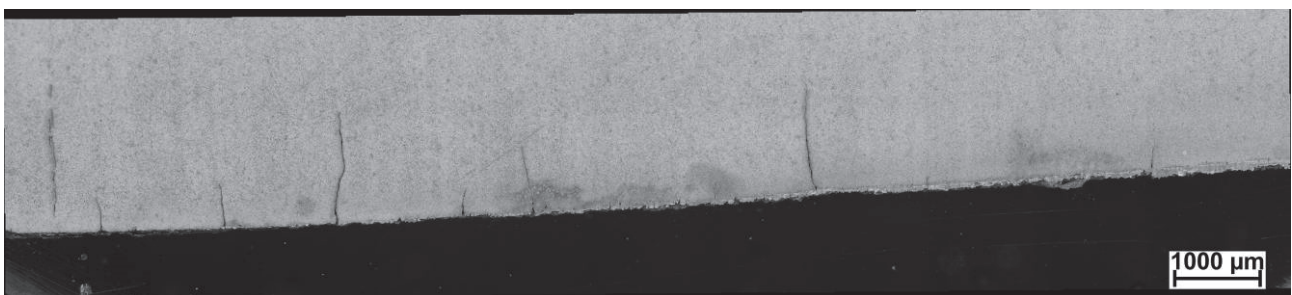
A macroscopic view of the sample surface after 5 series heat shock area about 153 x 3 mm
